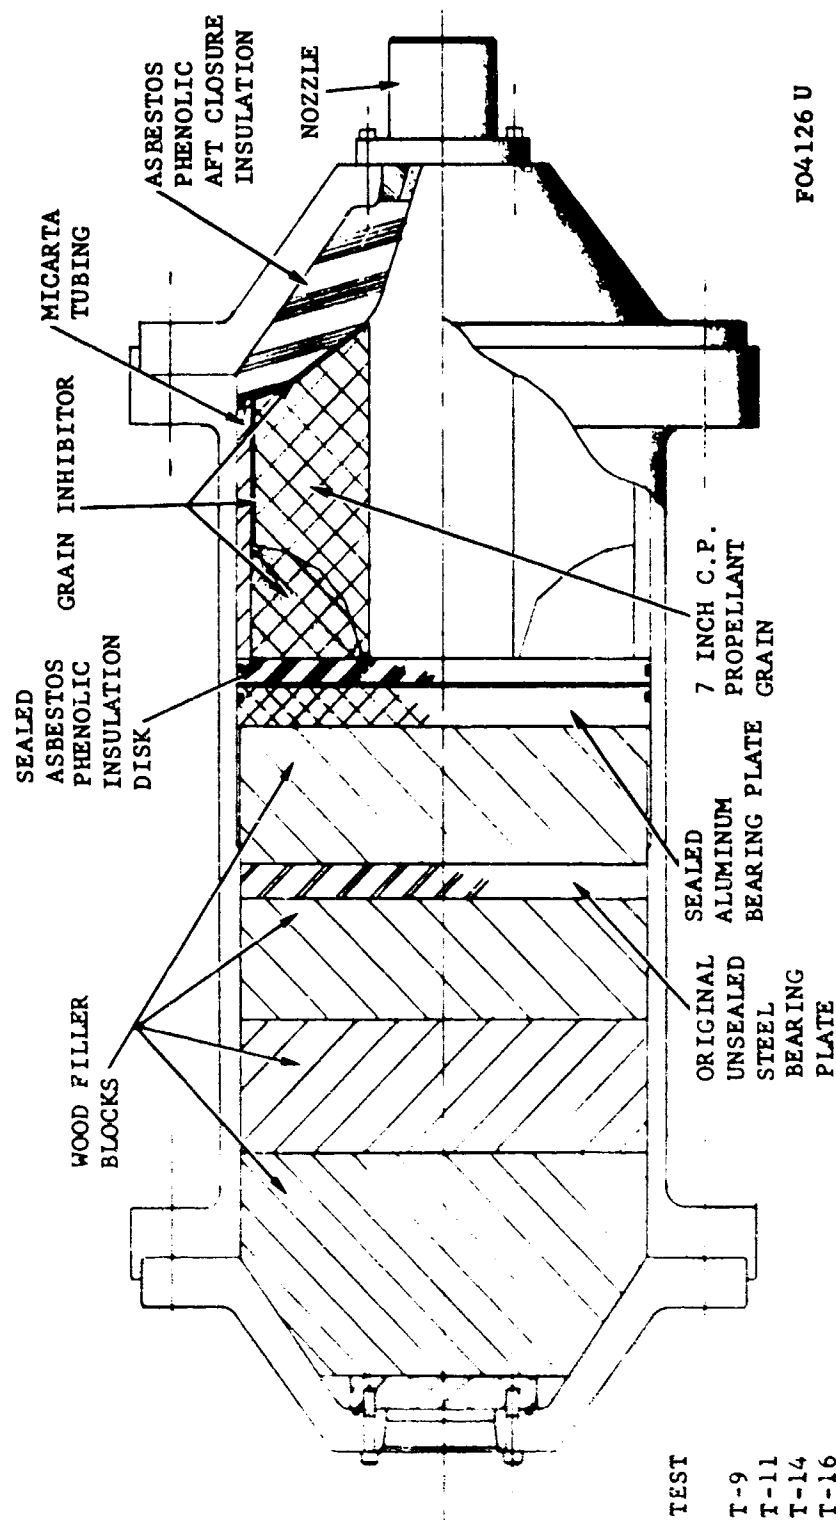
MOTOR CASE DESIGN - INTERNAL BURNING GRAINS TYPE I
